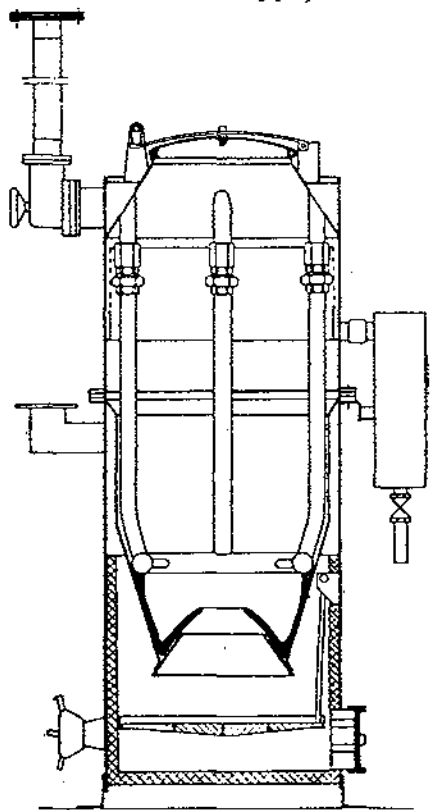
Wood Gas Generator for Boats, Swedish Generator Gas Co. (with the first sheet metal V-hearth, inside air pipes, condensation-water conveyor with a tank, and removable fuel store)
